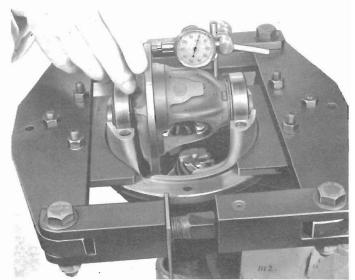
Measuring the crown wheel mounting face of the carrier prior to dismantling
